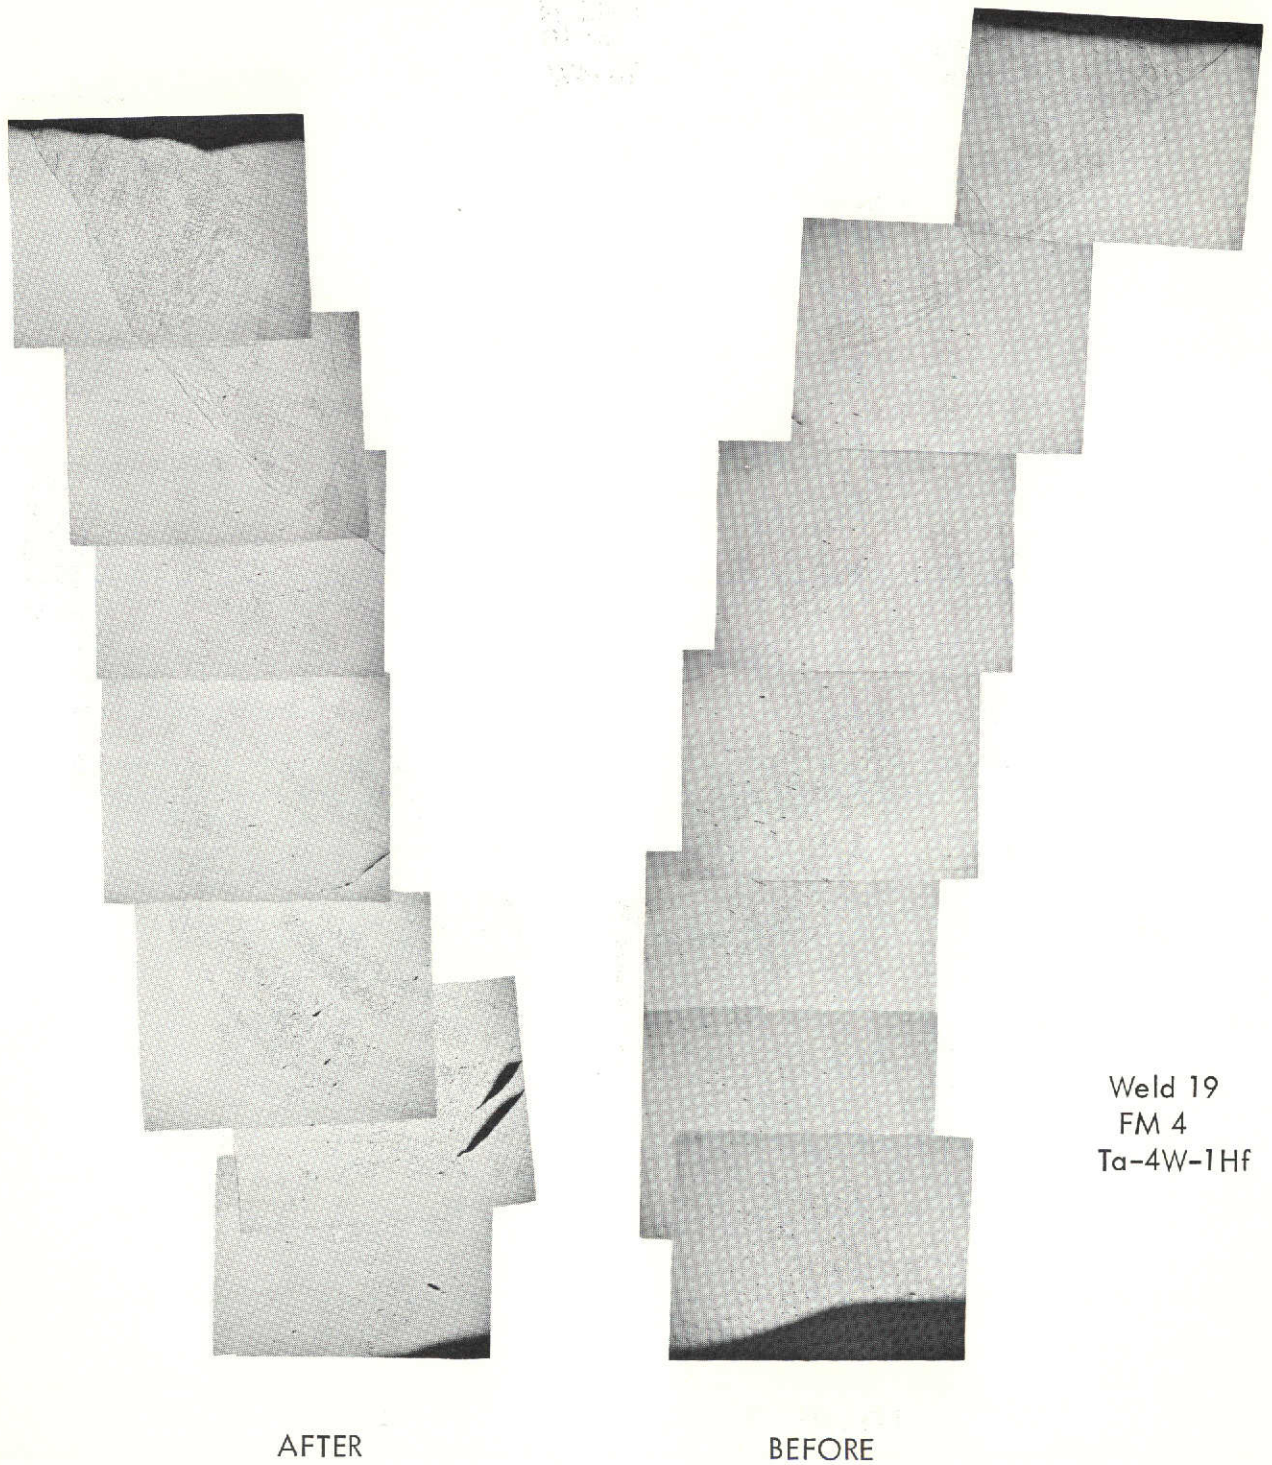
As-Bend Tested Plate Weld Specimen. Single "V"
